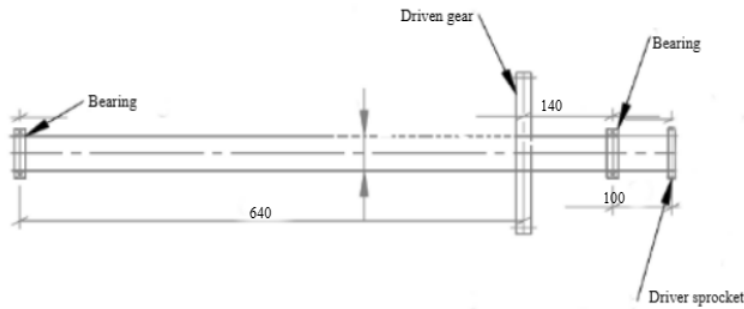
Output shaft with a driven gear, chain, driver sprocket and bearings
